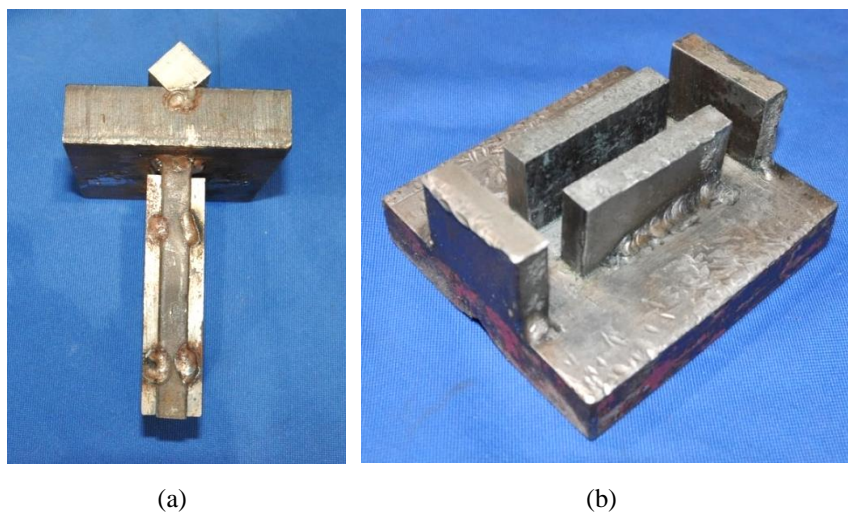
I-section columns test set-up: (a) square bar welded to a metal T-shape piece; (b) base plate with 35-mm thick steel plates welded to it.
